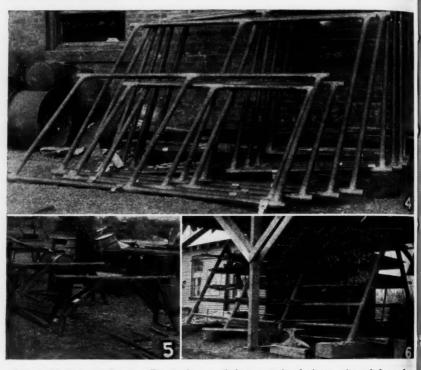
Welded gate frames. Fig. 5—Iron work horses made of pieces salvaged from the scrap pile and welded together. Fig. 6—A sturdy rack of all-welded construction.
